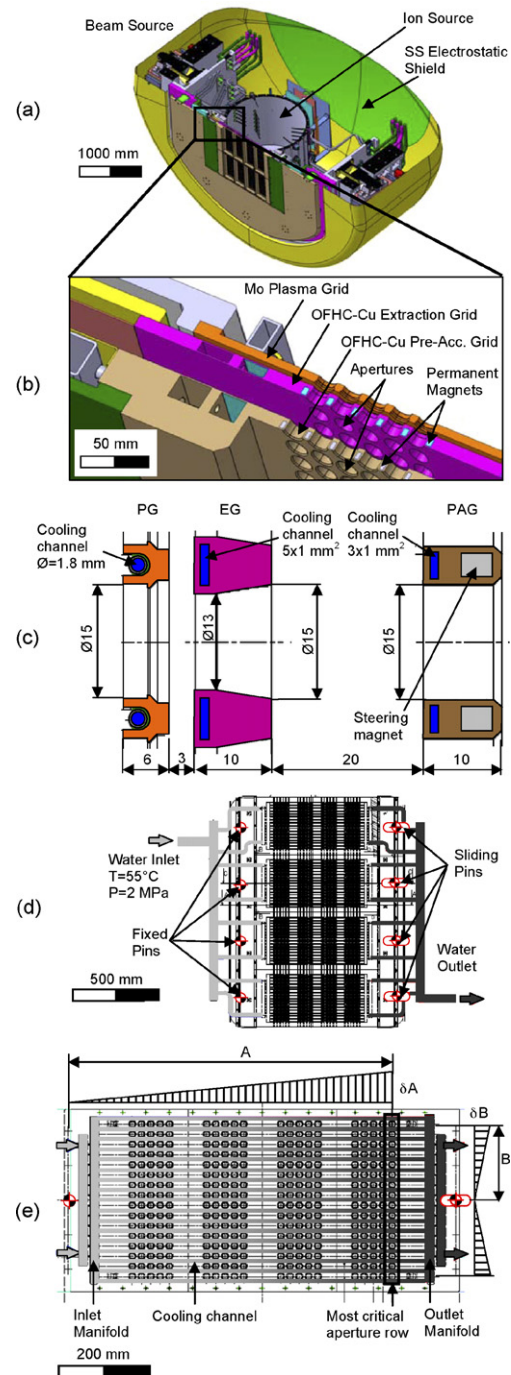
Plasma, extraction and pre-acceleration grids: (a) beam source overview; (b) grids detail; (c) grids vertical section; (d) grid cooling scheme; (e) segment cooling scheme, with aperture shifts.
